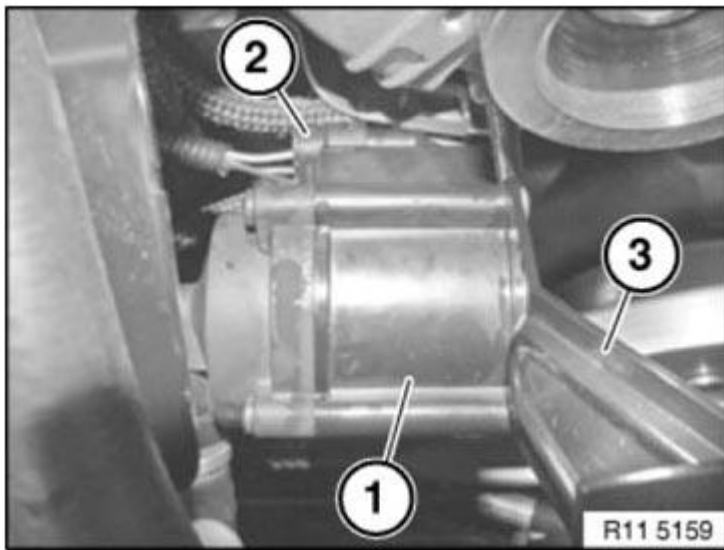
Identifying Plug Connection, Holder And Auxiliary Water Pump
